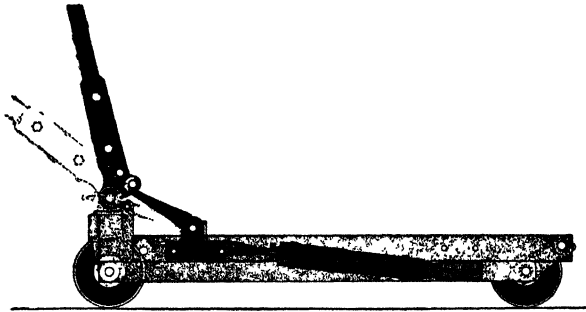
Hand-lift truck, showing positive platform elevating connection and positive check.
